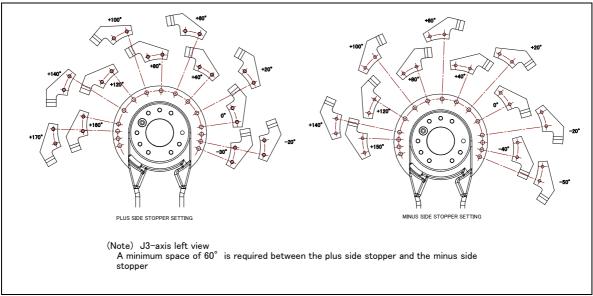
(d) Attachment of J3-axis movable mechanical stopper
